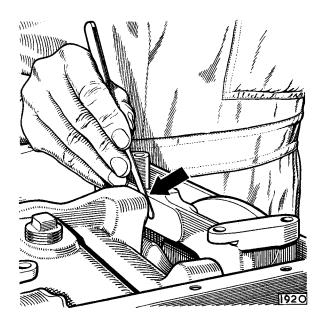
Measuring the clearance between the inner fulcrum mounting bracket and the differential casing.
